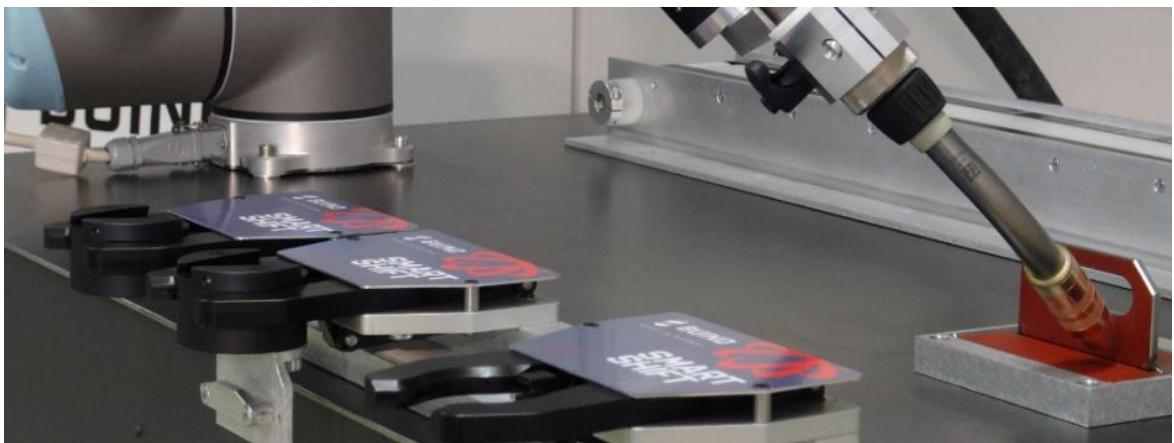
SmartShift for Changing Tools (Buind, 2018)
